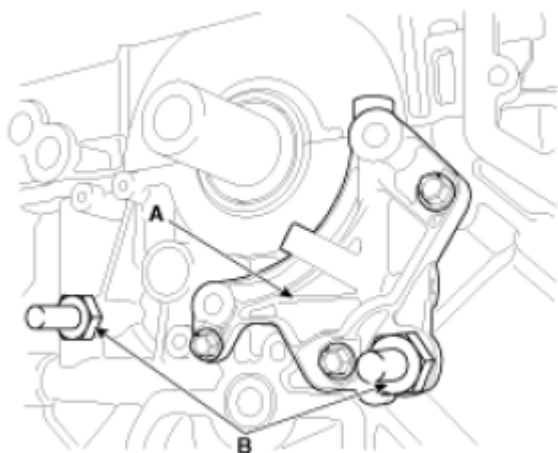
Identifying Tensioner Adapter And Timing Chain Guide Bolts
